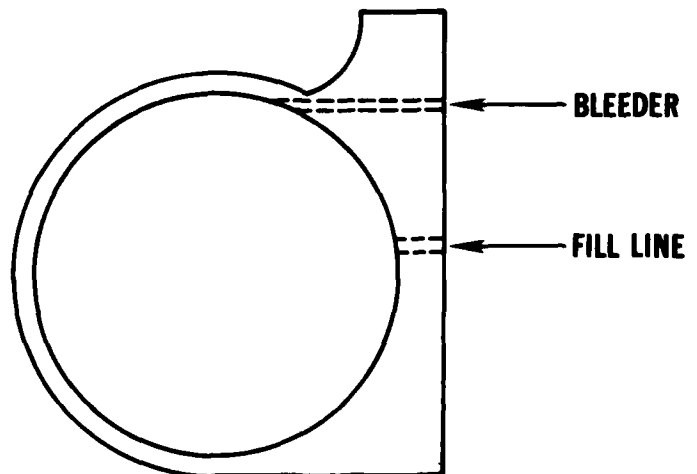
Cross-sectional diagrams of wheel cylinders showing location of line and bleeder holes.
